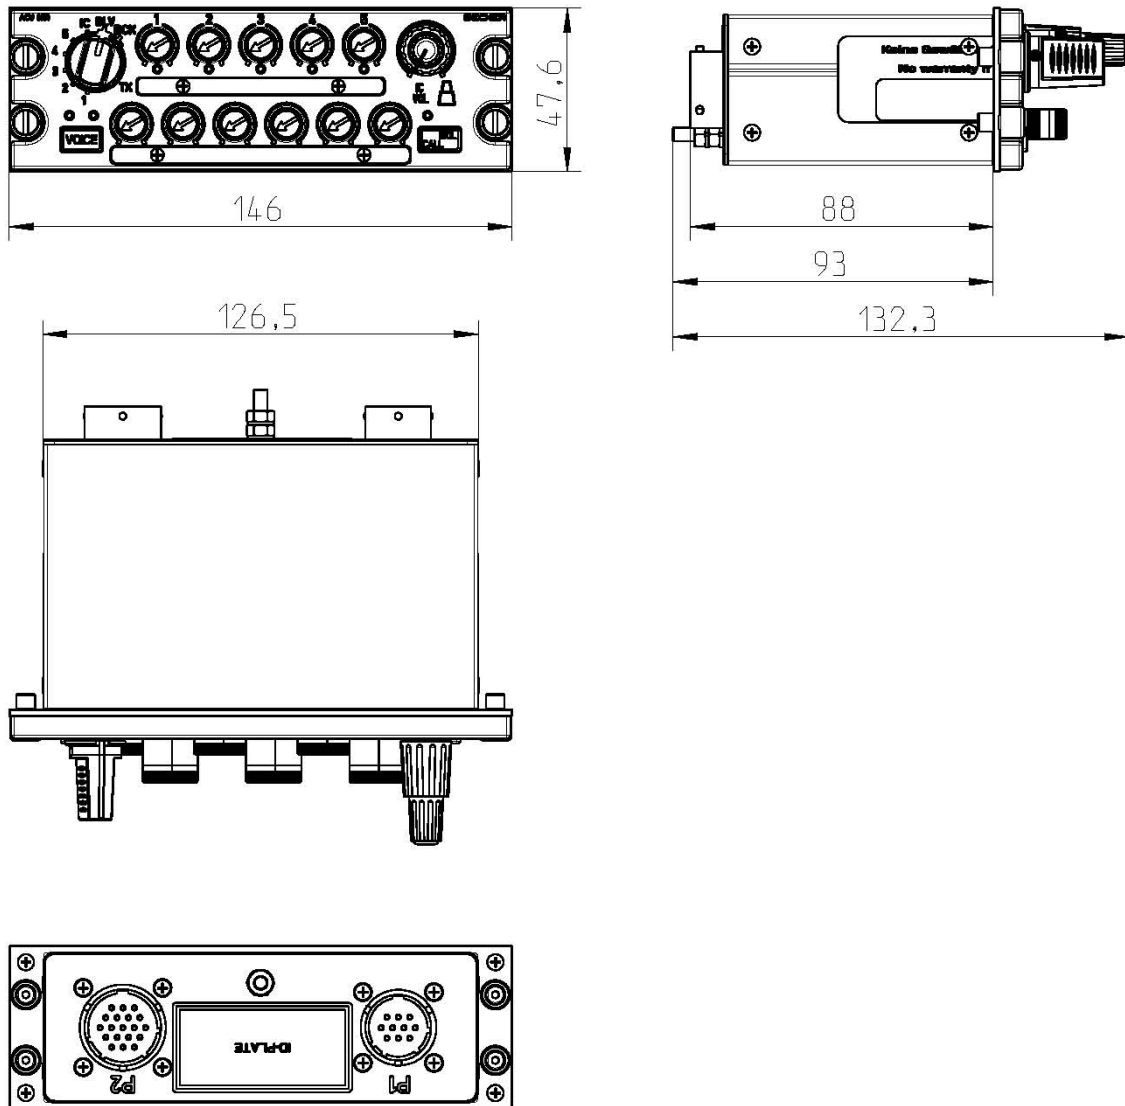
Installation dimensions Audio Control Unit (measures in mm)
